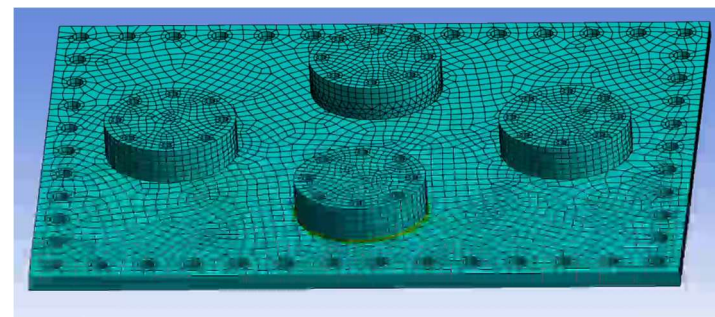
Welding Sequence C: Alternate Cross-Pattern
